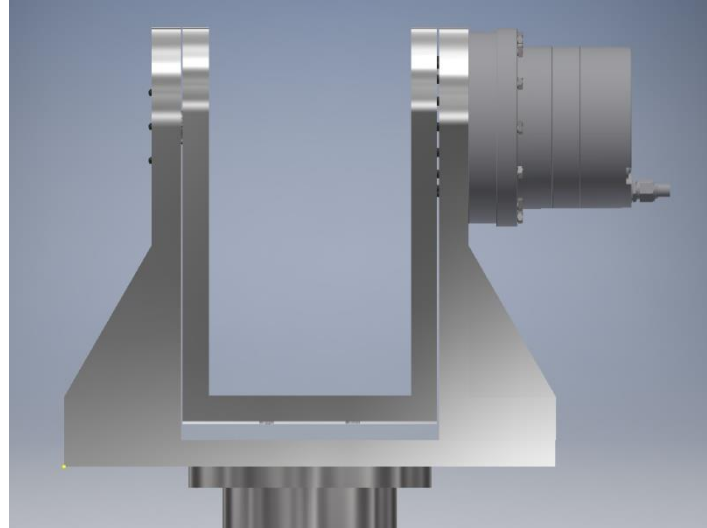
Front view of cradle device with SHA actuator from Harmonic Drive.
